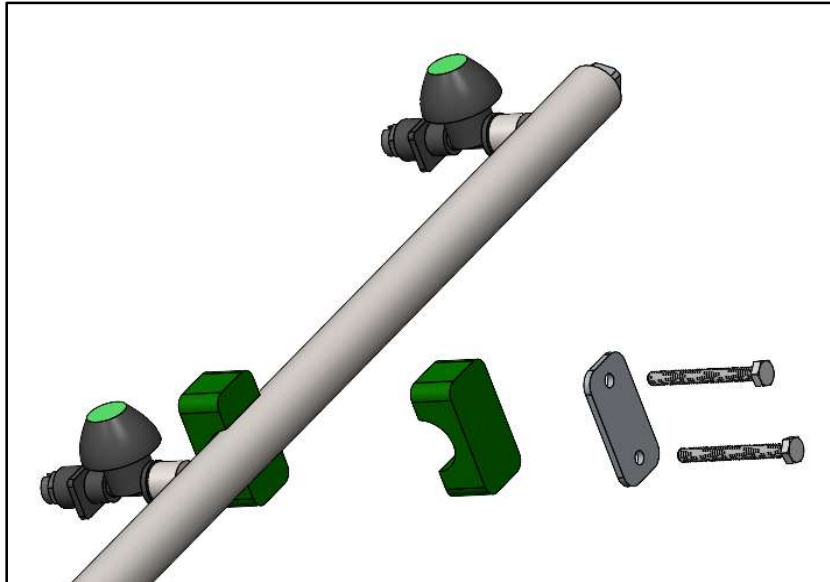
Hinge mount clamp assembly order. End result should be the two green pieces pressed around the manifold.
